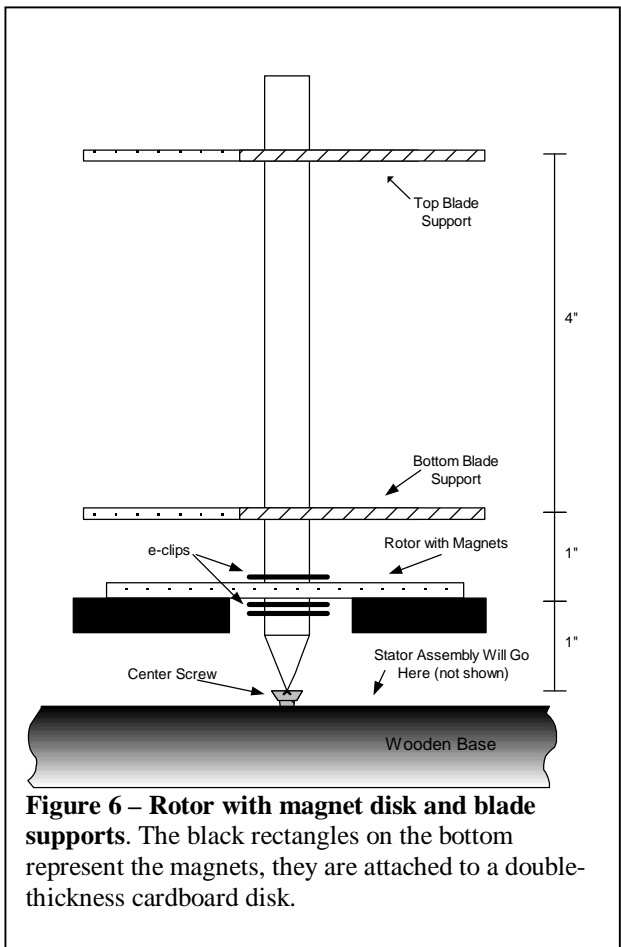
Rotor with magnet disk and blade supports. The black rectangles on the bottom represent the magnets, they are attached to a double-thickness cardboard disk.
